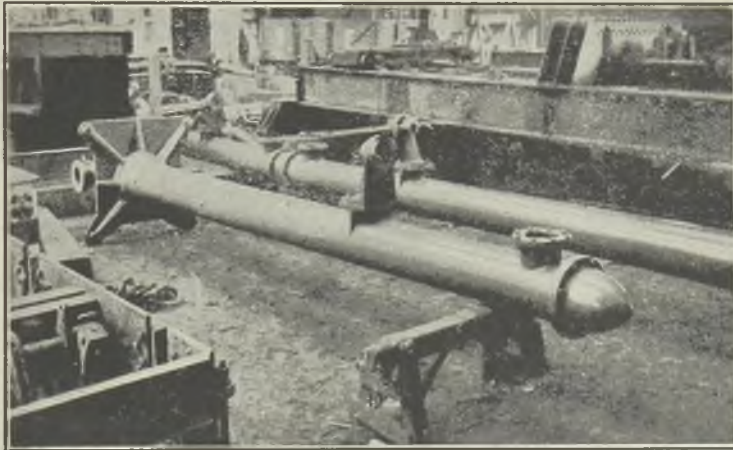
A 15-FT. COLUMN AND PART OF 22-FT. COLUMN.
